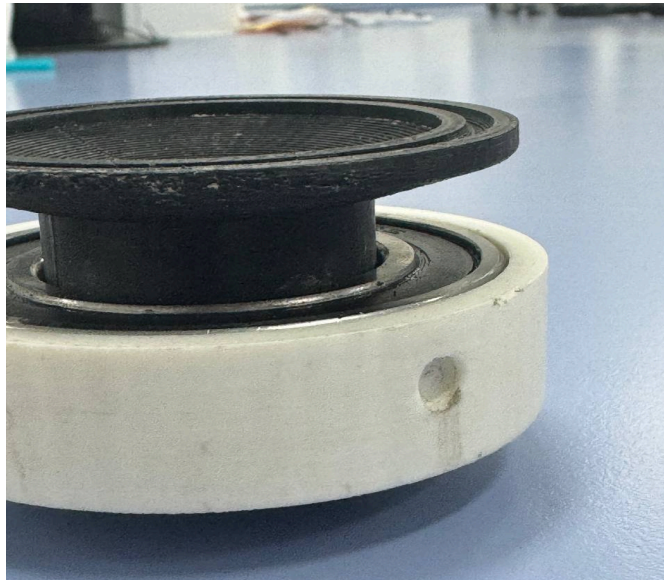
Partial-depth holes of 3 mm in the bearing holder
